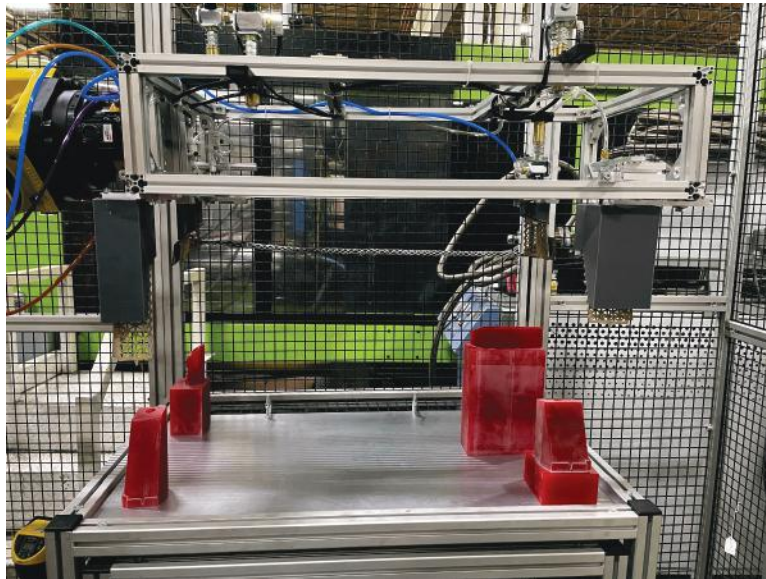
The pick-and-place fixture and end-of-arm tooling picking up tow and hardpoints.
